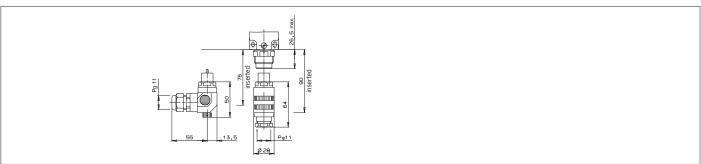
Dimension drawing for NZ2VZ-5... with plug connector SR6
